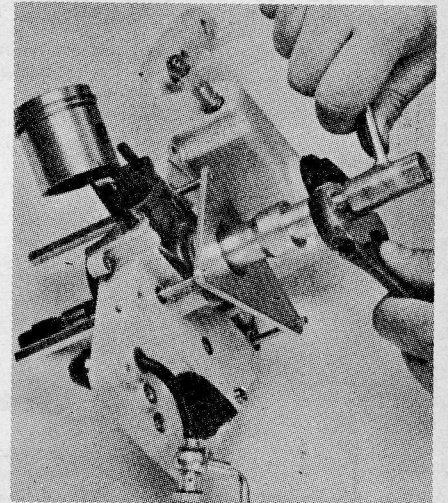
Partner tool number 381 912 shown being used to push crankshaft from left half of crankcase.
